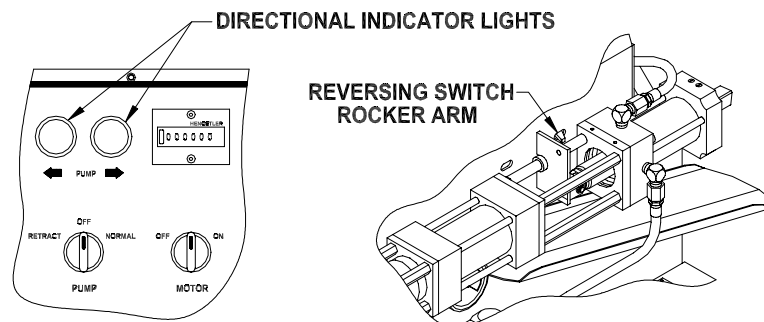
Directional Indicator Lights & Reversing Switch Rocker Arm
